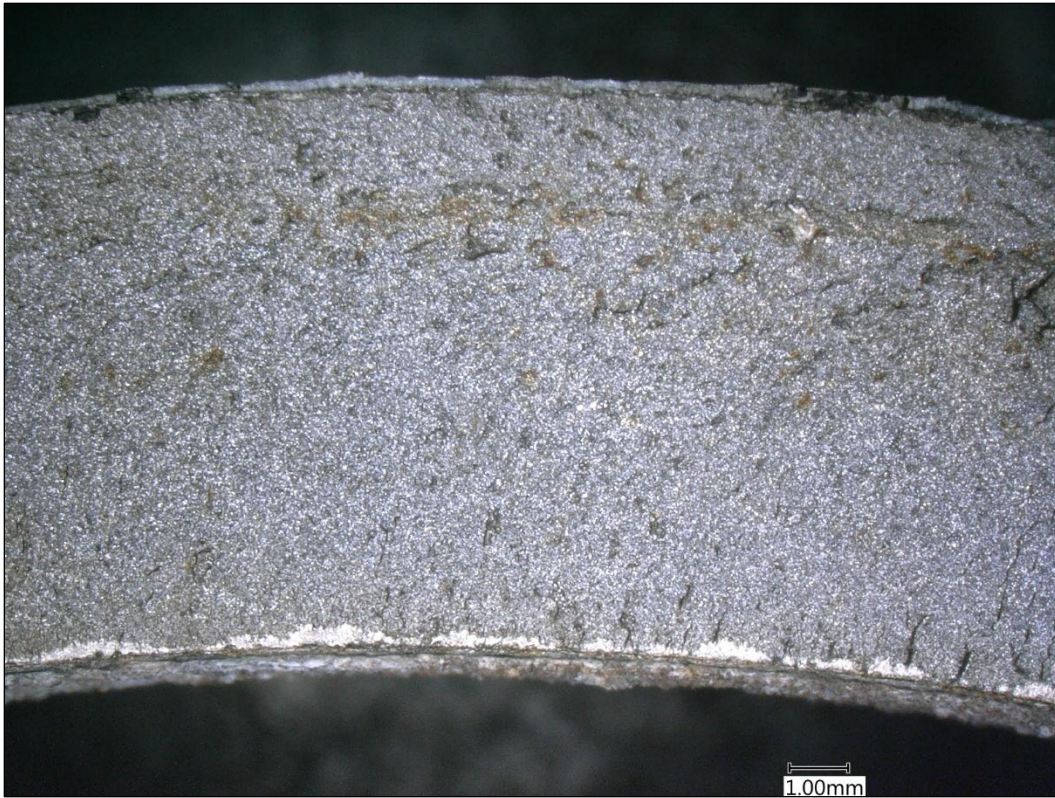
Reference 22 brittle fracture heading toward fatigue zone.
